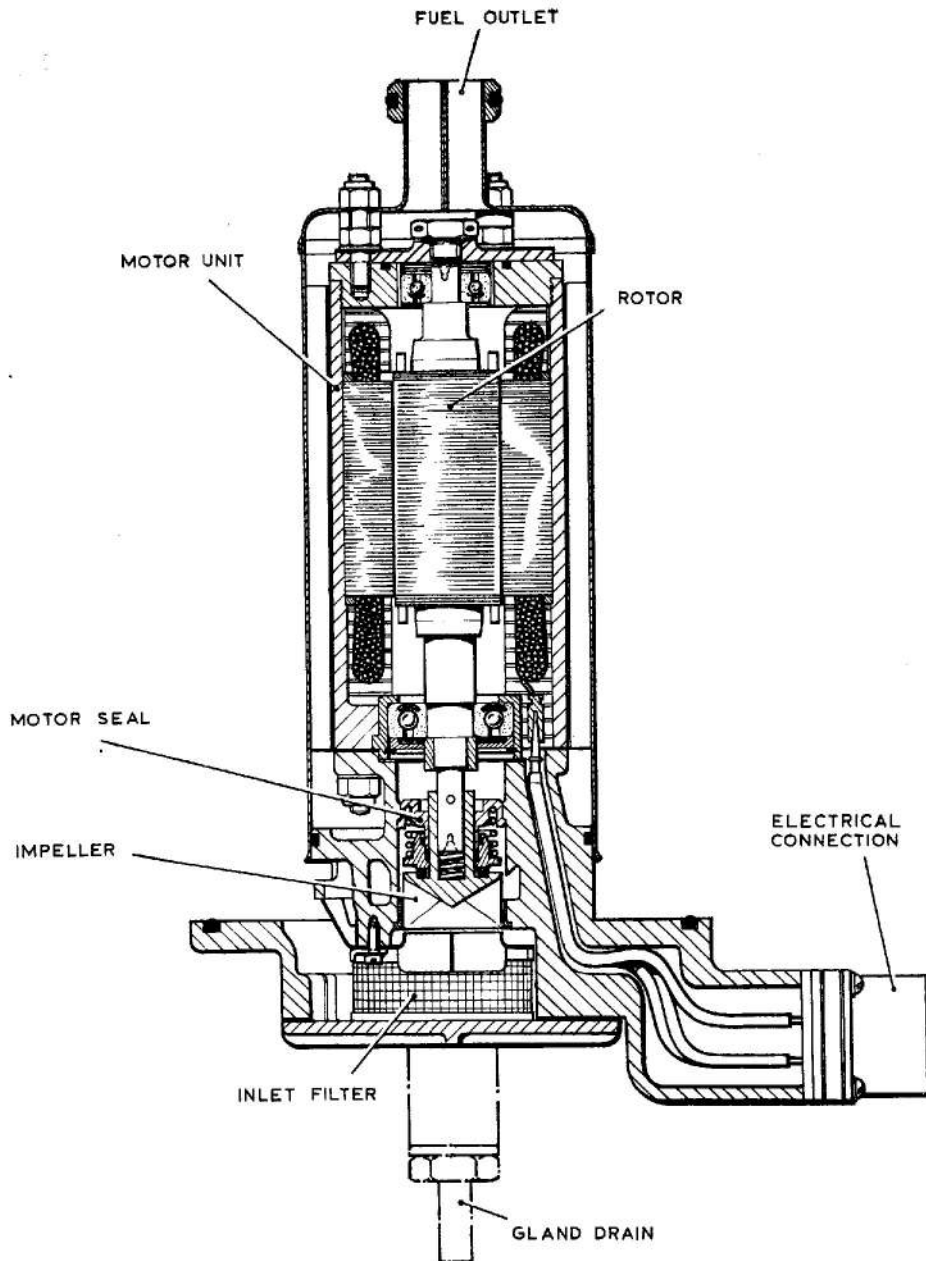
Sectional view of Type PAC. 100 fuel pump
